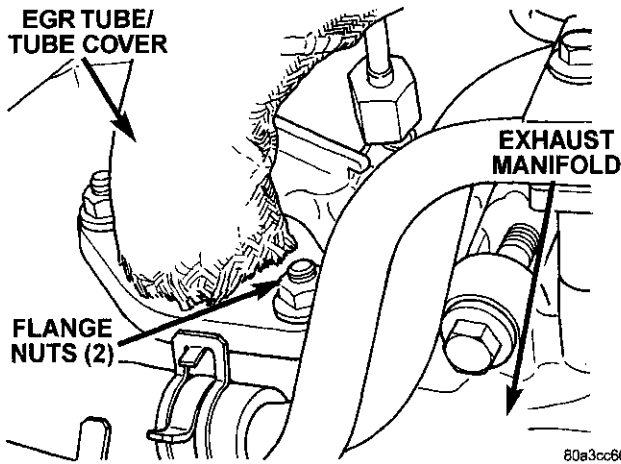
EGR Tube Nuts at Exhaust Manifold
